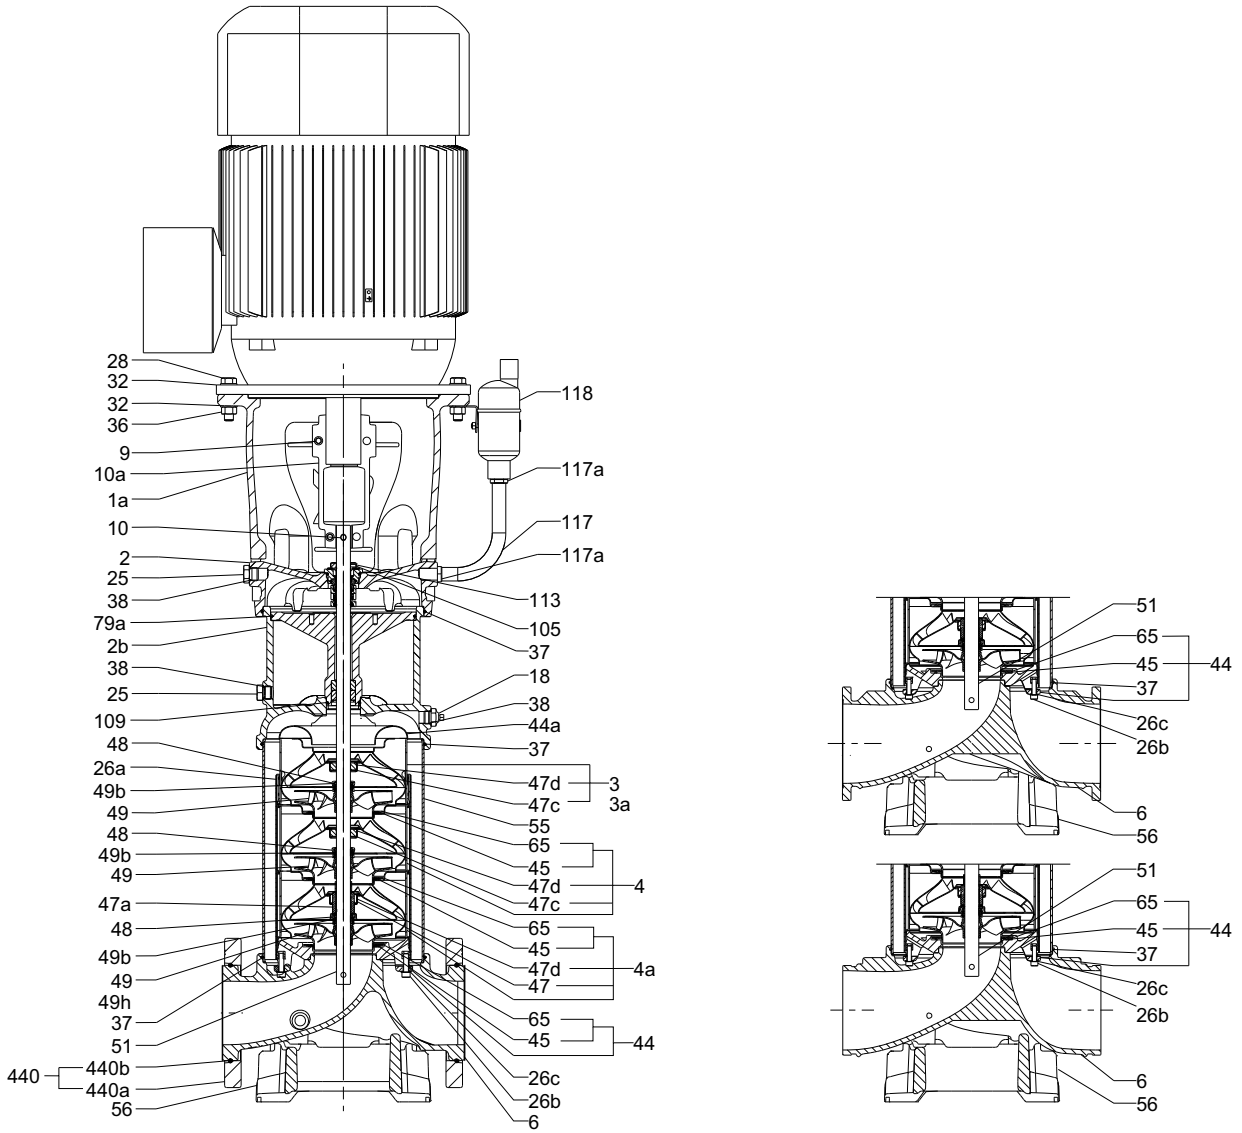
Sectional view of CR, CRN pump with air-cooled top
